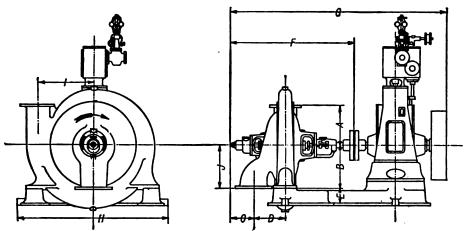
ALBERGER REGULAR VOLUTE PUMPS.
